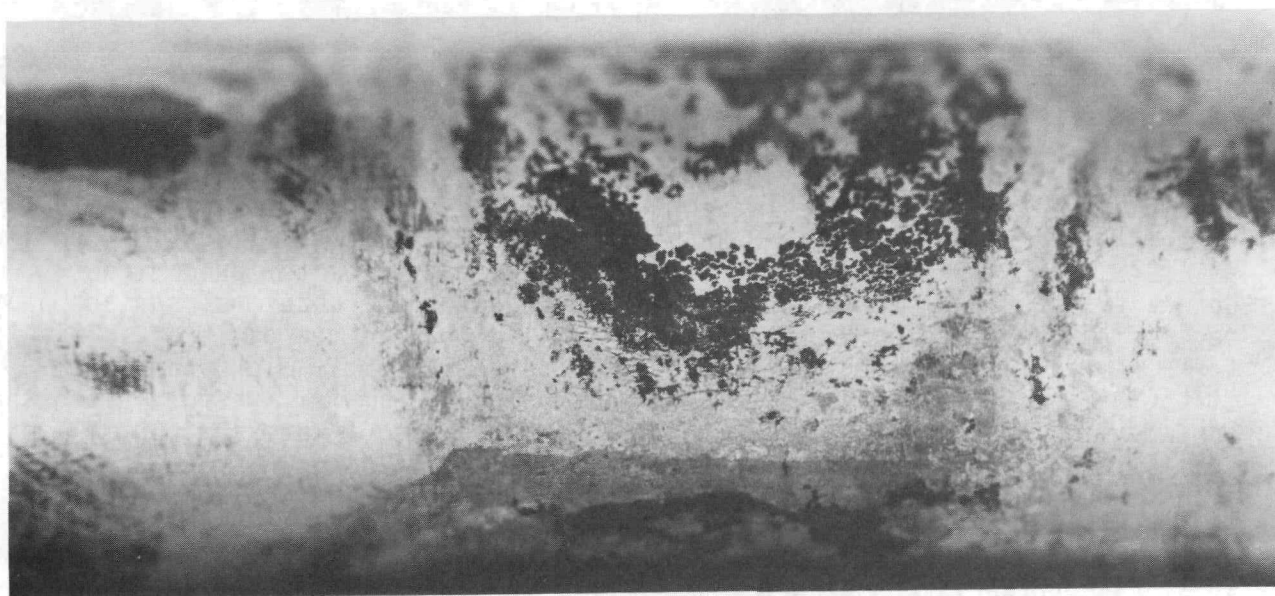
Photograph Showing OD Surface Corrosion of First TSP Specimen 1041 (R4 C51 HL) (26.9% strain)
